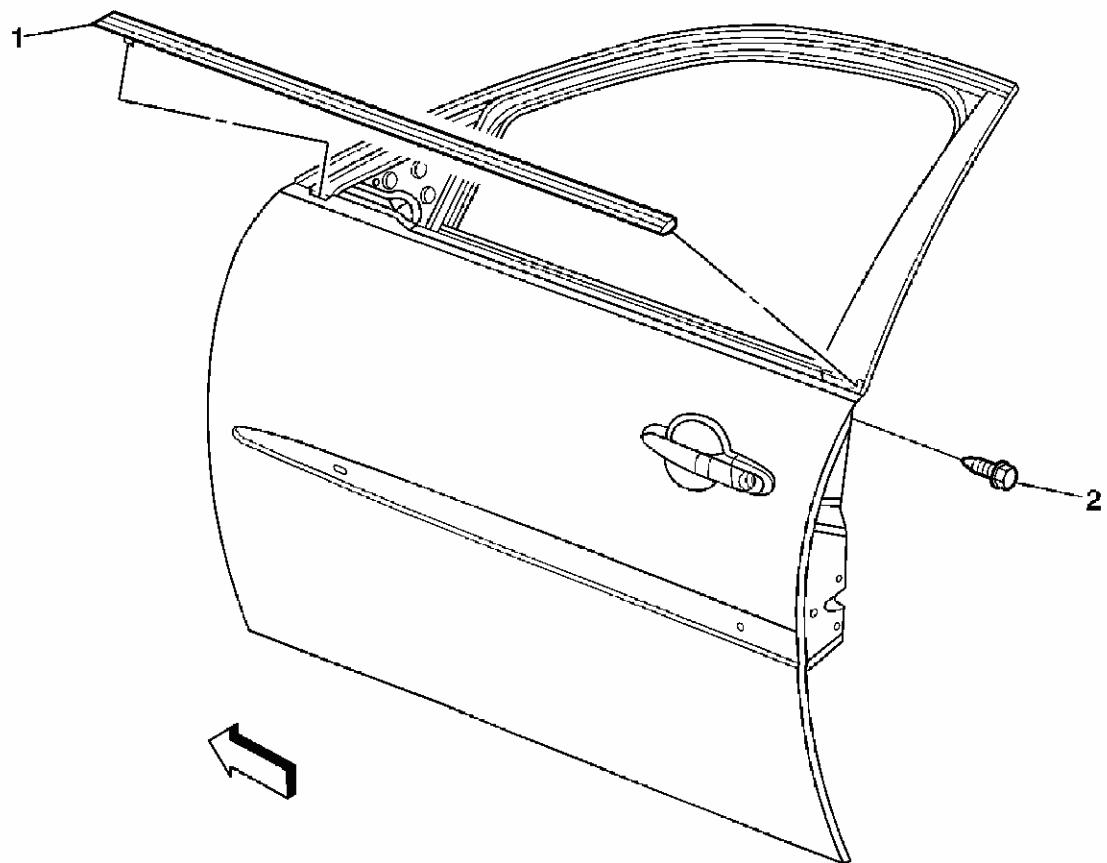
Identifying Front Side Door Window Belt Outer Sealing Strip
